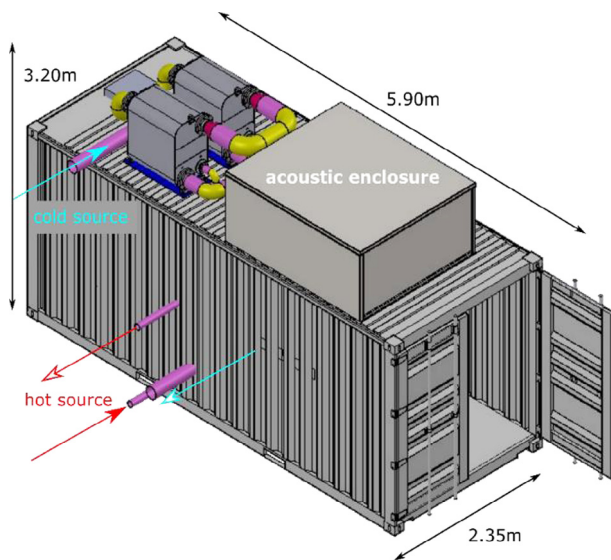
External view of the TFC power unit with connections and overall dimensions.
